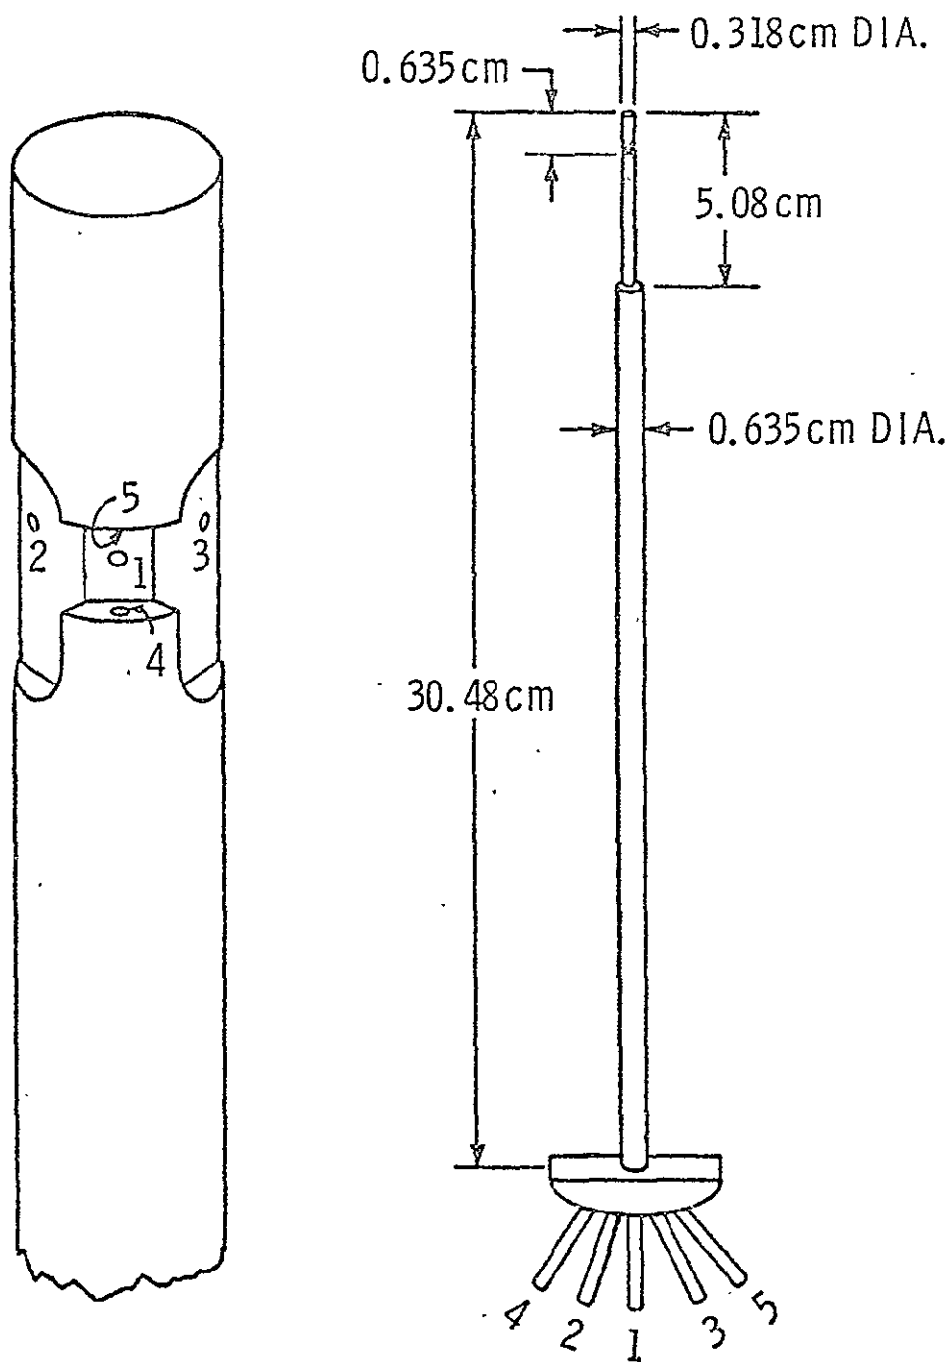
An enlarged sketch of the sensing element and an overall view of a United Sensor five-hole probe, Type DA-125-12-F-10-CD.
